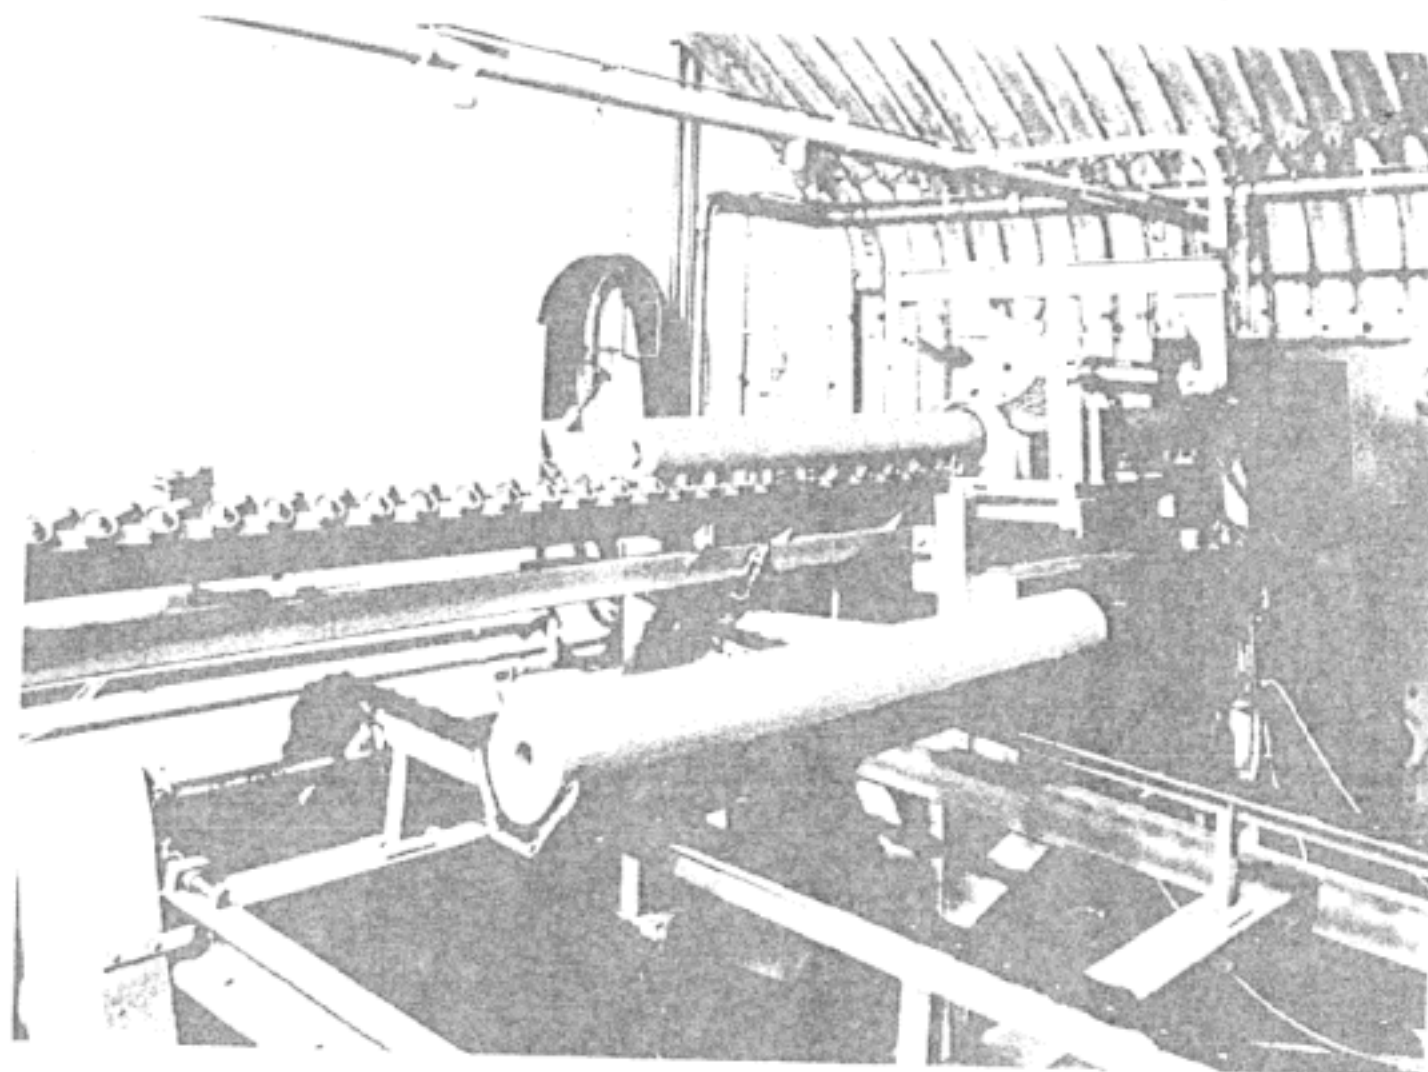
Roller conveyer of finished tubular product Courtesy Dynamit Nobel A.G., D-5000 Köln (Dellbrück).
